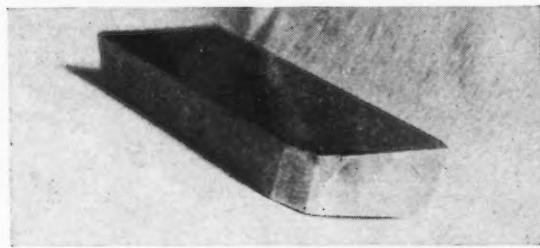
Chipping of the OD is usually caused by excessive vibration in either the workpiece or the machine itself. The remedy for this is machine adjustment, a new machine, or a better method of holding.
